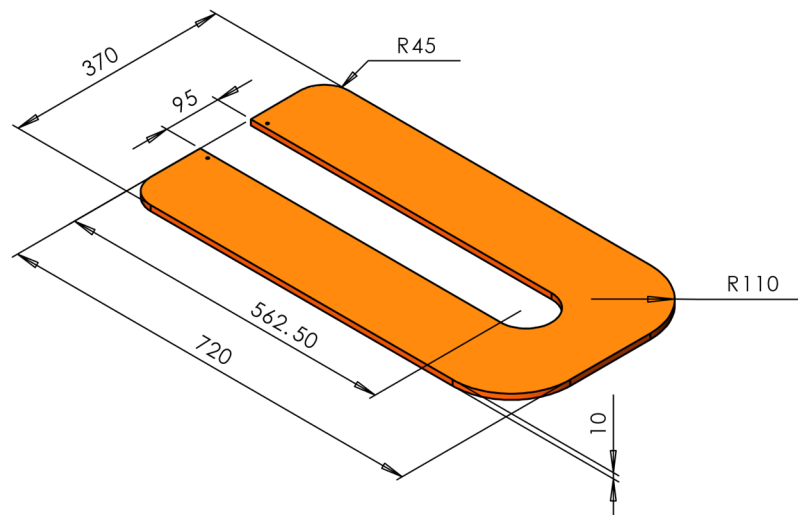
Dimensions of the designed support tray for the pick-coil windings.
